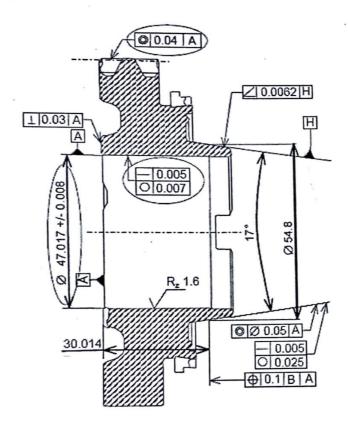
Typical surface adn dimensional acuracy demands in gear hard turning [11].
